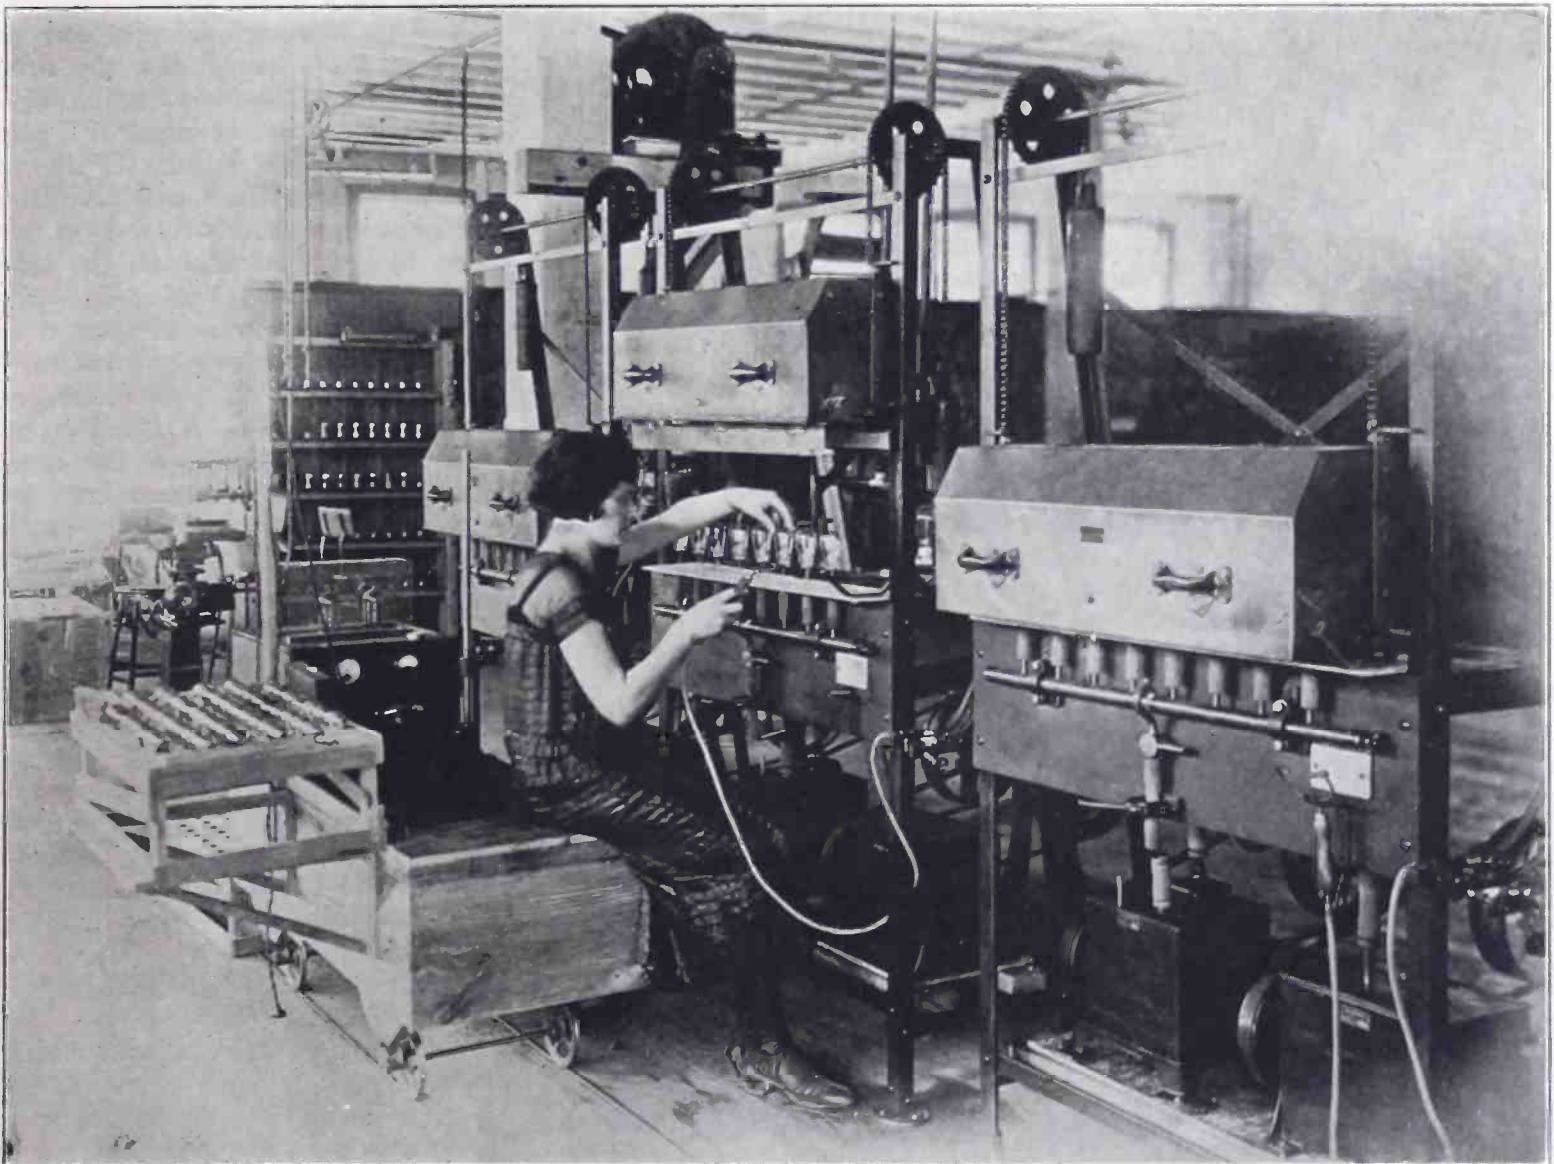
The Heart of a Vacuum Tube Factory, the "Exhaust Positions" and "Bombarder." The young lady is not the bombarder; she is merely sealing-off a row of exhausted and bombarded tubes. An expert tube-man generally operates this machine.
